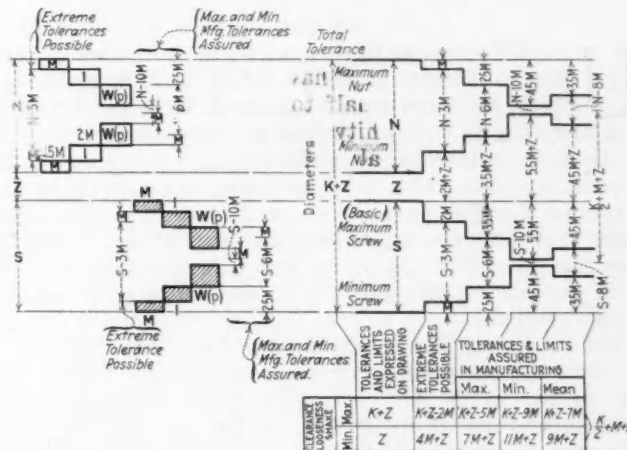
SCHEME OF THREAD GAGE TOLERANCES USED TO SOME EXTENT IN UNITED STATES
